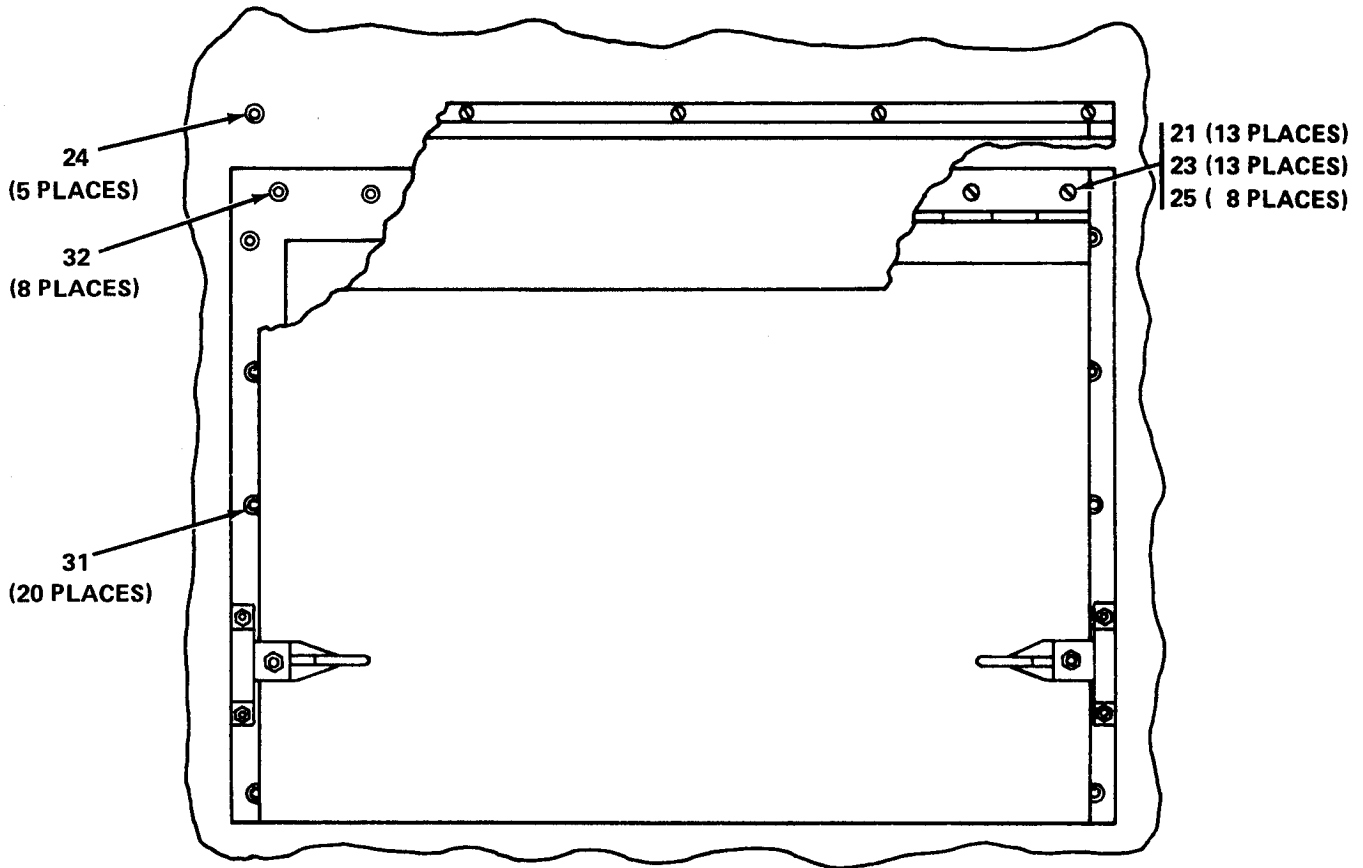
Power Entrance Box Cover Assembly (Sheet 4 of 4)
